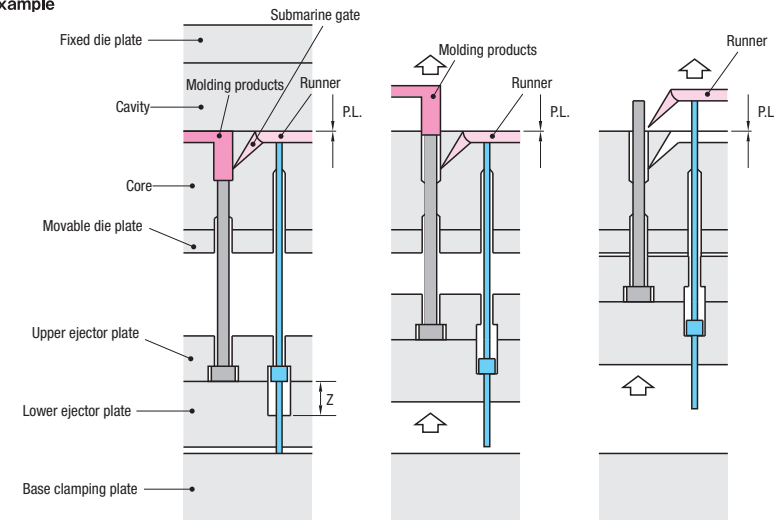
• Mold closed      Fig. 2 • Mold opening      Fig. 3 • Mold opened
